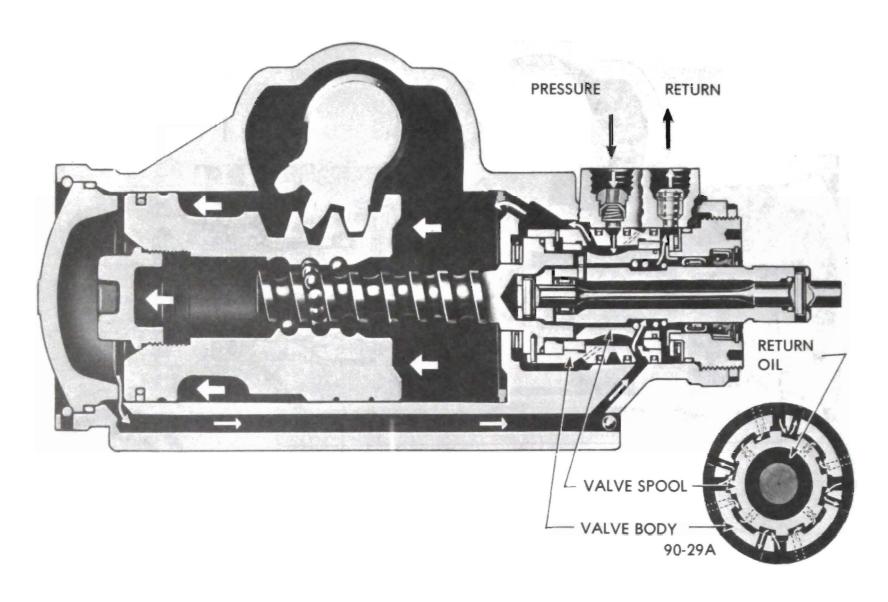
Oil Flow in Power Steering Gear (Left Turn)
